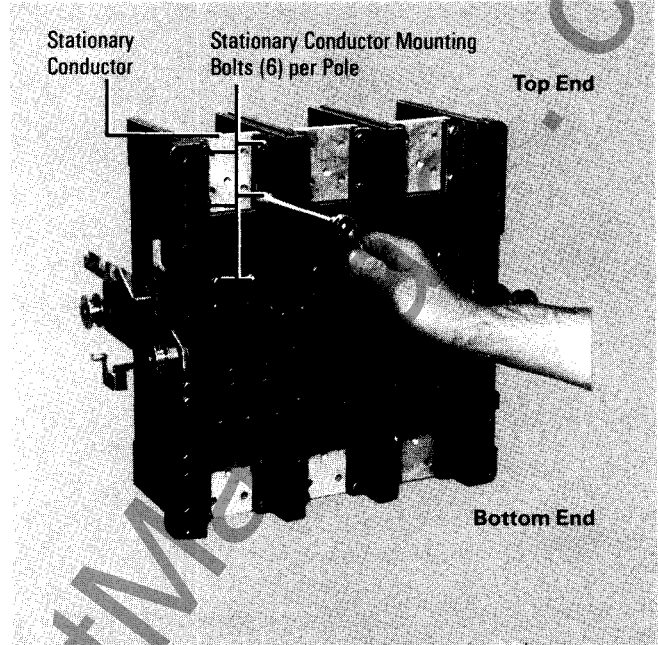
Removing Stationary Conductor Mounting Bolts (1600 Amp Breaker).
